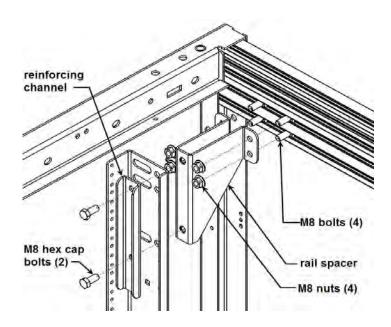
Equipment mounting rail for 800 mm wide cabinet
